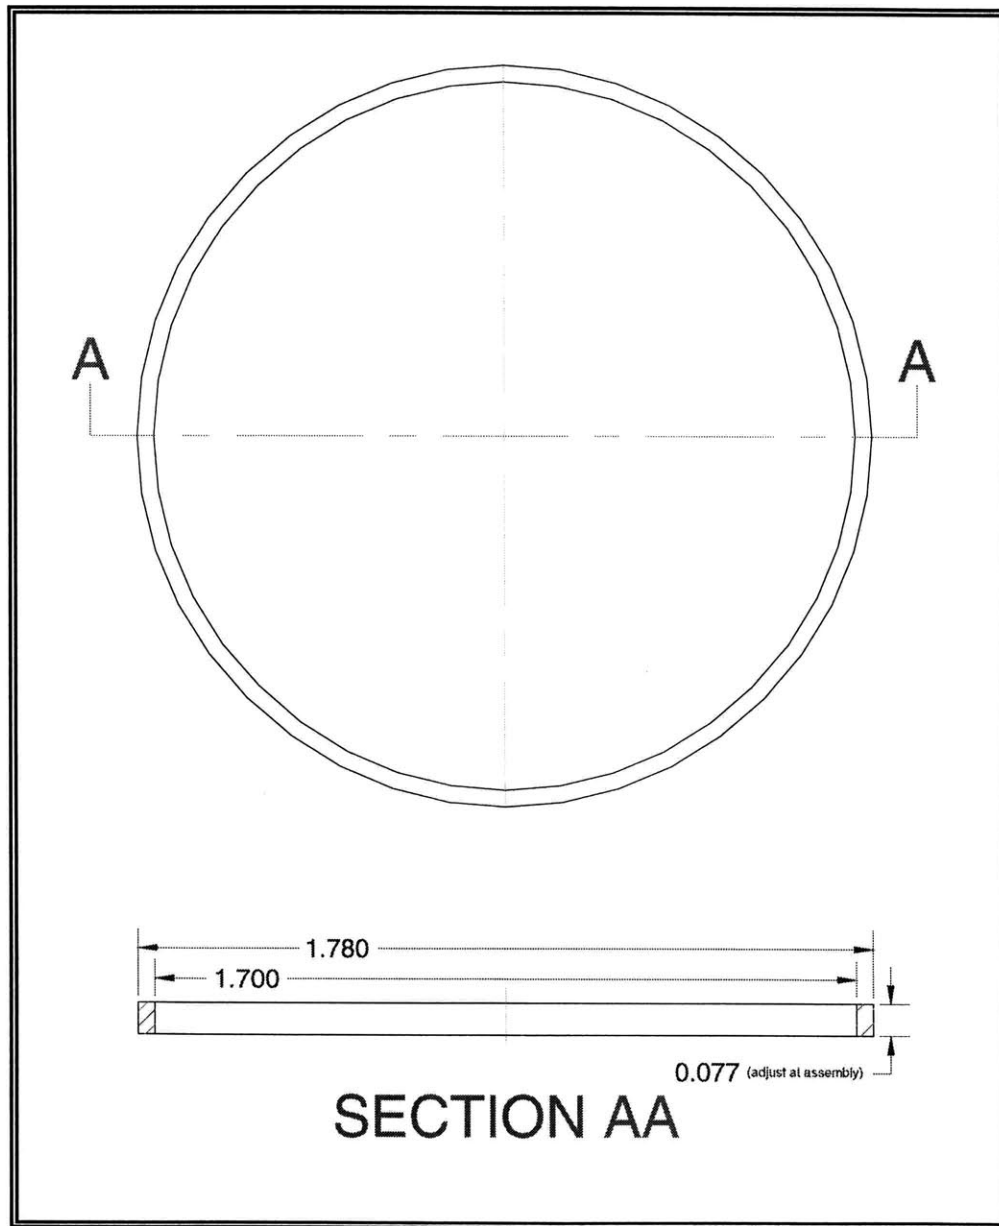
The height dimension of spacer ring can be adjusted by sanding to accurately regulate the minimum outlet valve lift
